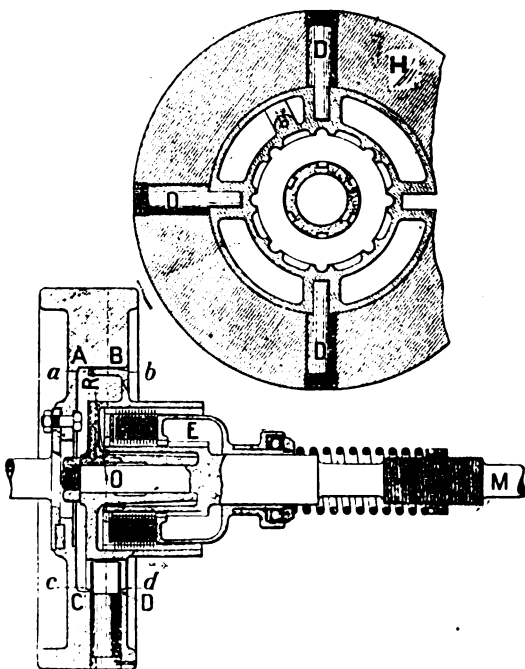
The Cottin-Desgouttes Improved Clutch.
